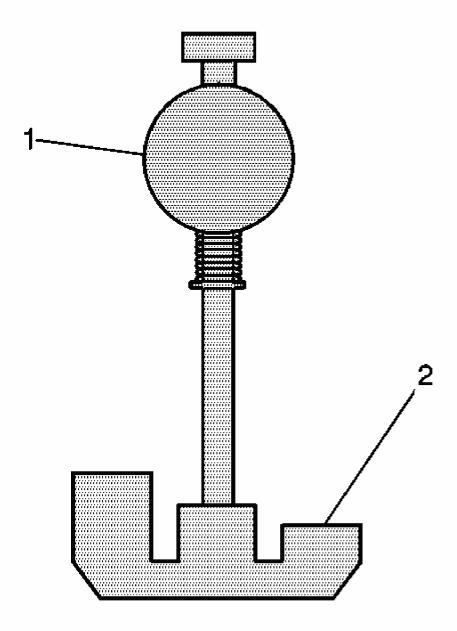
View Of J 21777-1 & J 44416-3 Courtesy of GENERAL MOTORS CORP.
